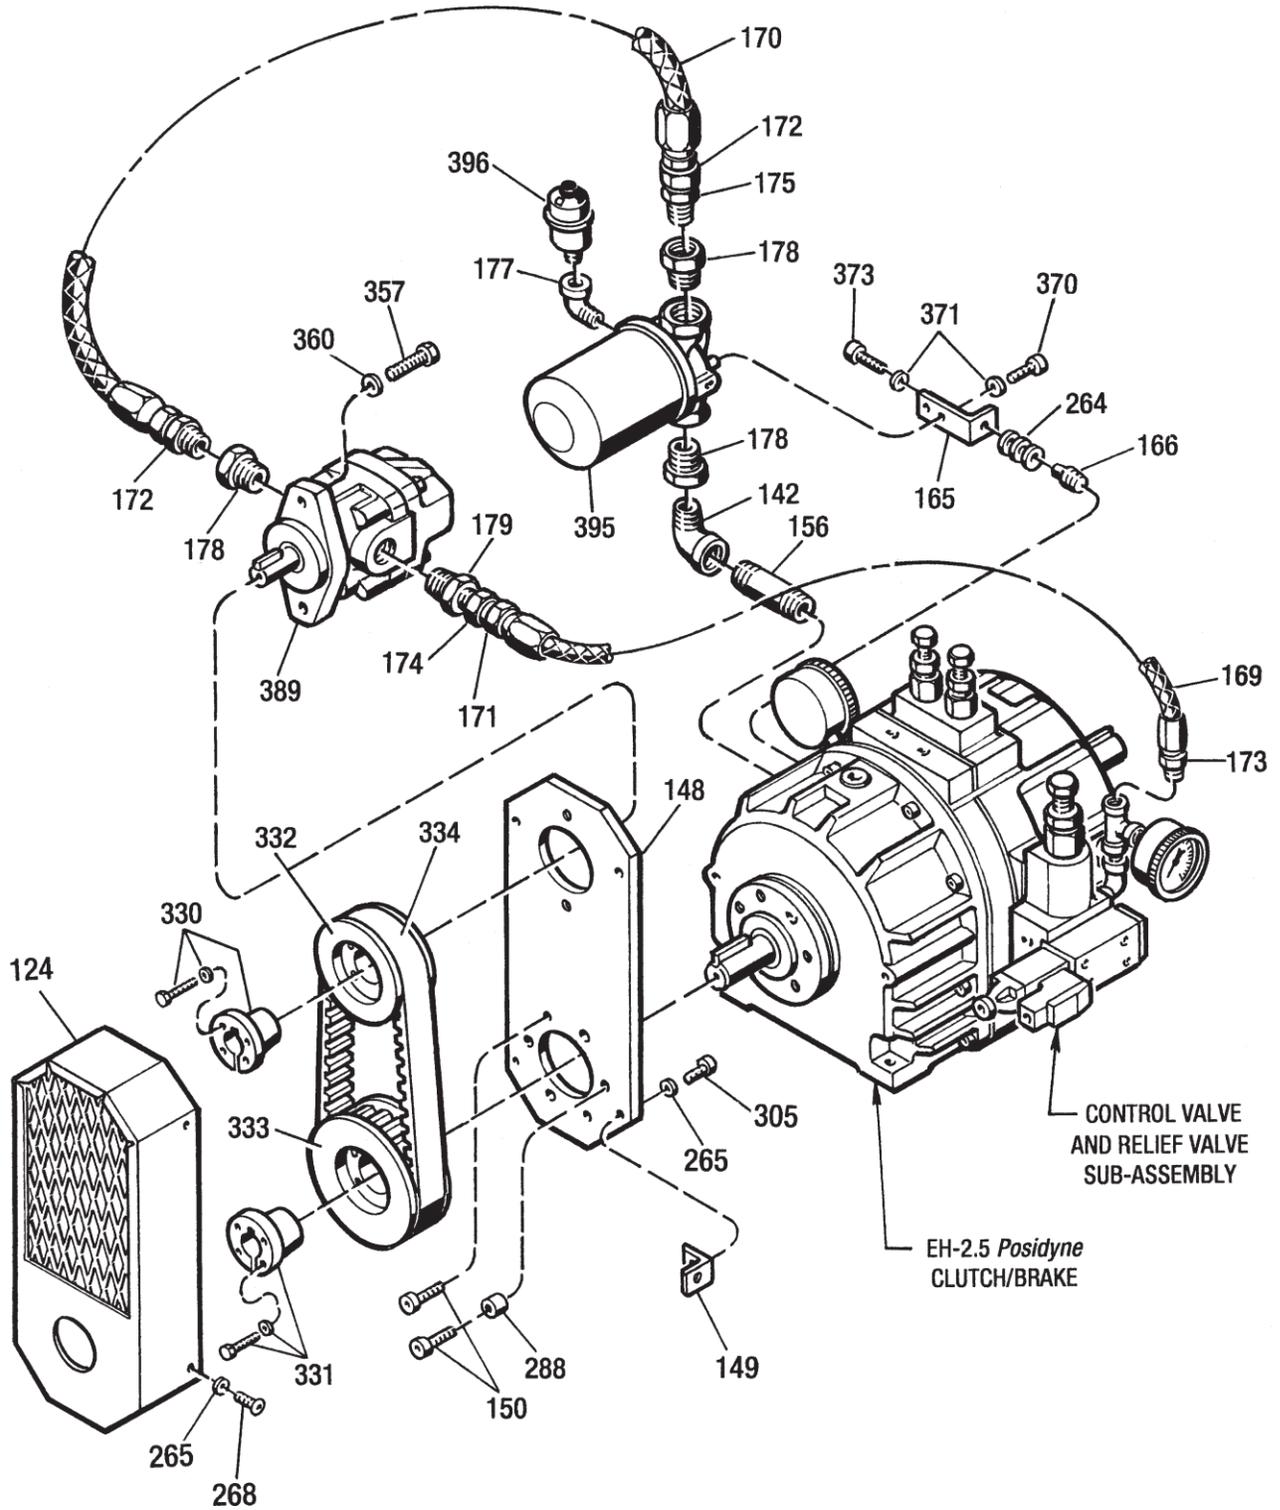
Piggyback Mounting/Pulley Driven Pump
